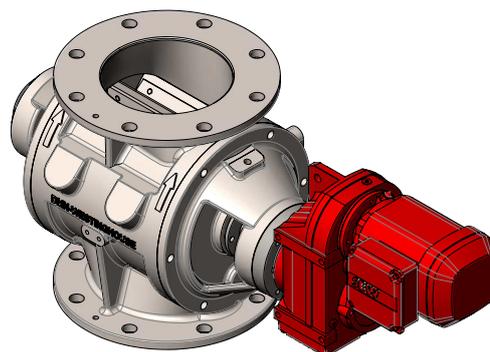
Direct drive (with parallel shaft SEW FAZ motor)
